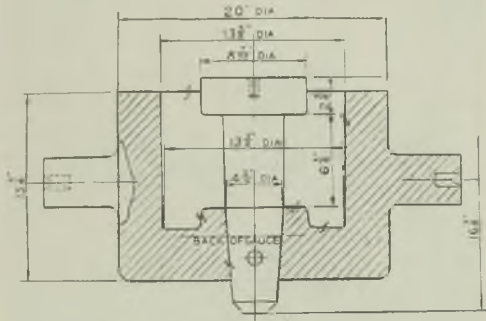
DESIGN FOR THE LARGEST TYPE OF MOULD.
